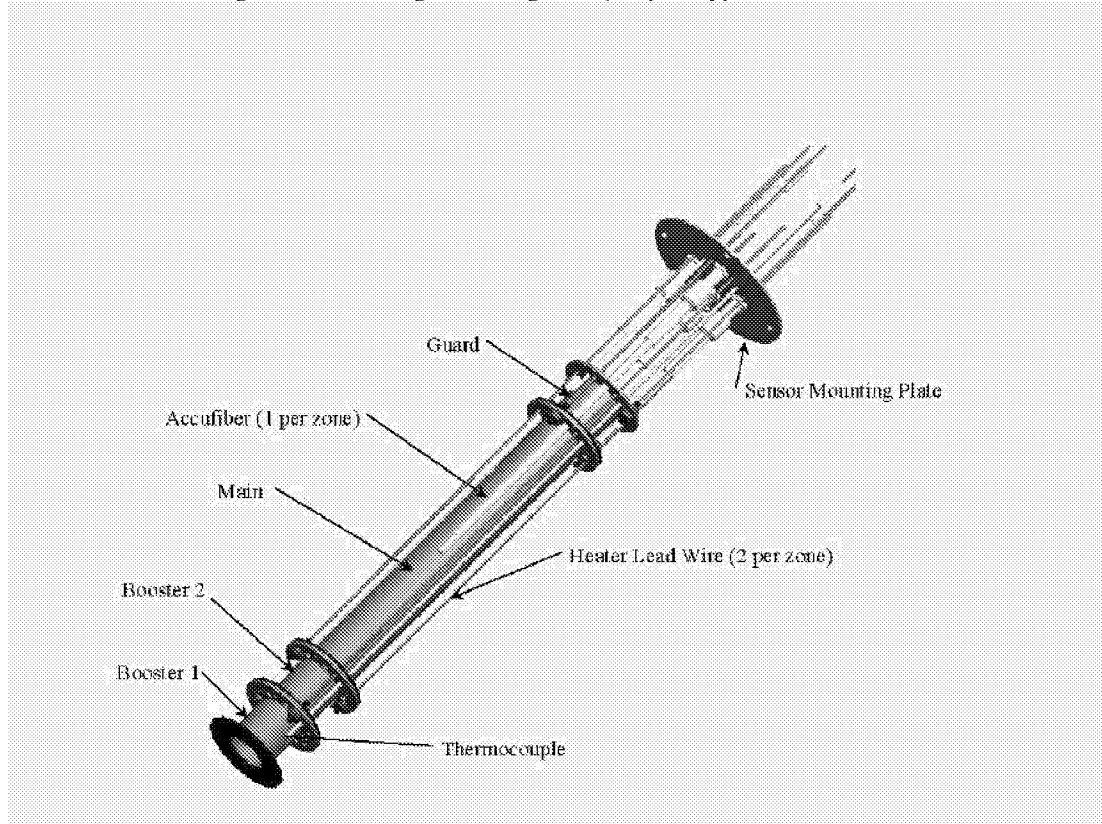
QMI Hot Zone (Heater Elements) Assembly¹.
